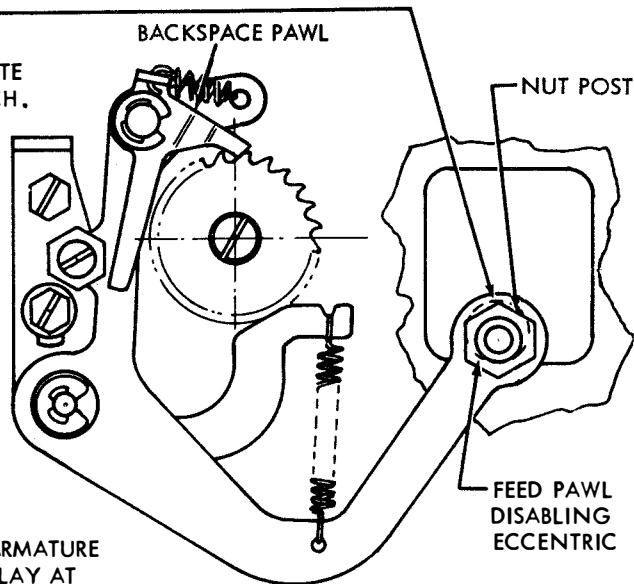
Back Space Mechanism (TT-253A/UG)
